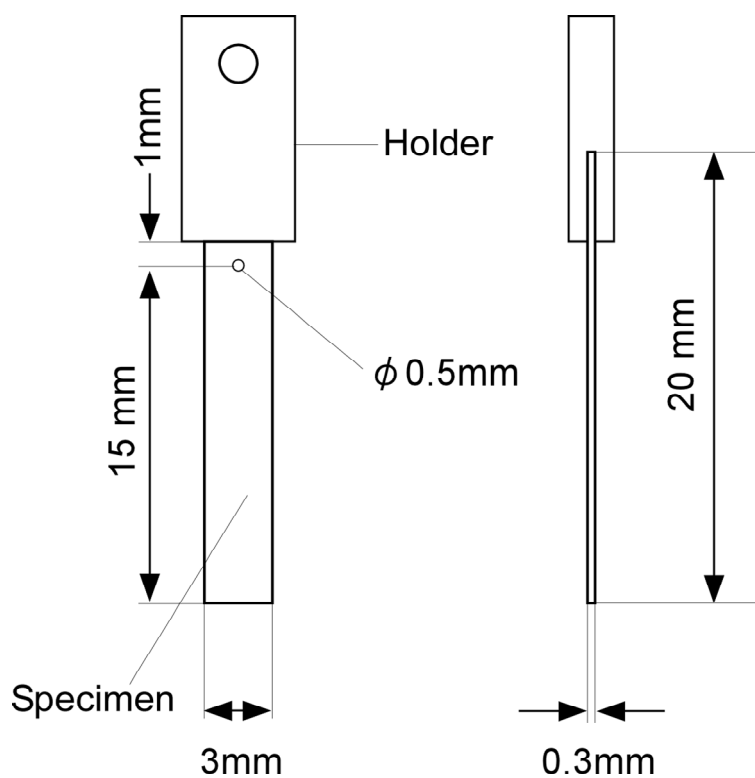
Shape and dimensions of fatigue test specimen of magnesium single crystal.
